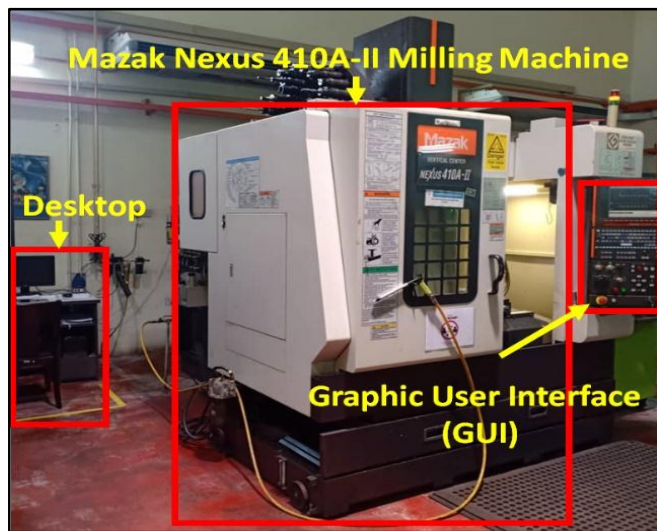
The Desktop and CNC Milling Machine at Premach Lab
